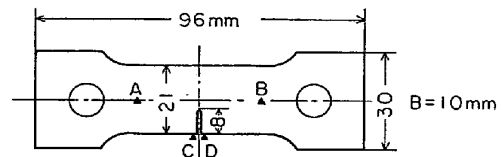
Dimension of the specimen used for fracture toughness testing under plane strain condition.
